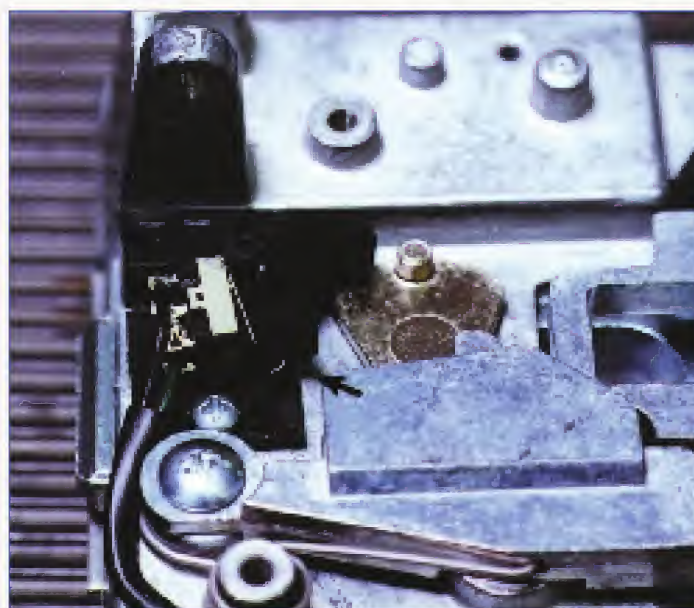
, shows the new switch and trigger assembly. This is located directly under the cam bridge (the cam bridge is the nose-like assembly that holds the inside cylinder). The trigger is activated by rotating the key in either the inside or outside cylinder. This trigger activates the upper switch which arms or disarms the device. The lower switch triggers the piezo sounder.
